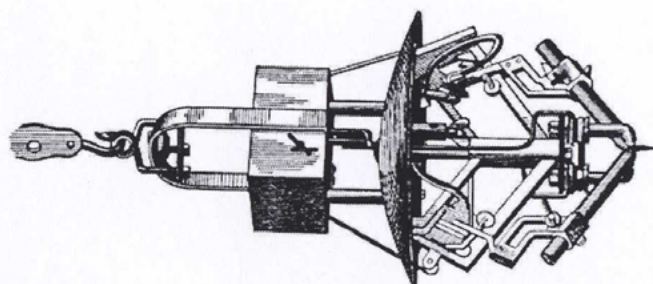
Arc welding torch designed by H. Zerener [6]
